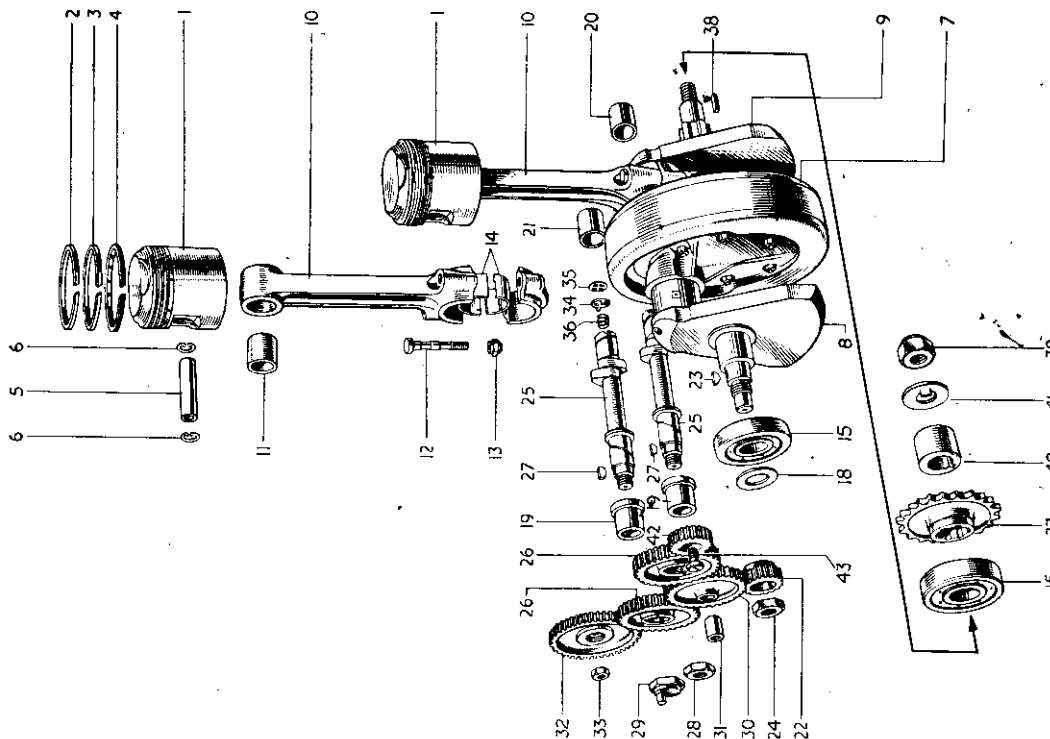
CRANKSHAFT, CONNECTING RODS, PISTONS, TIMING GEARS, etc.
